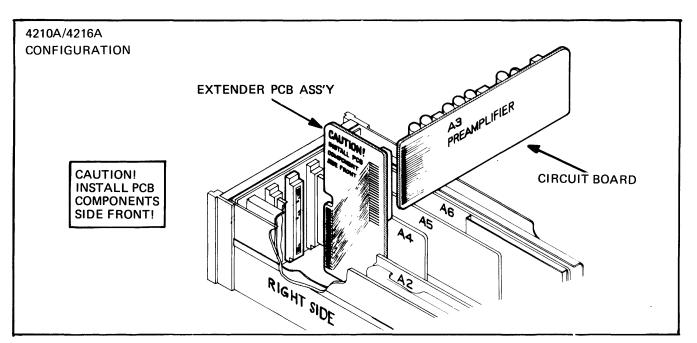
EXTENDER PCB ASSEMBLY INSTALLED IN 4210A/4216A INSTRUMENT
